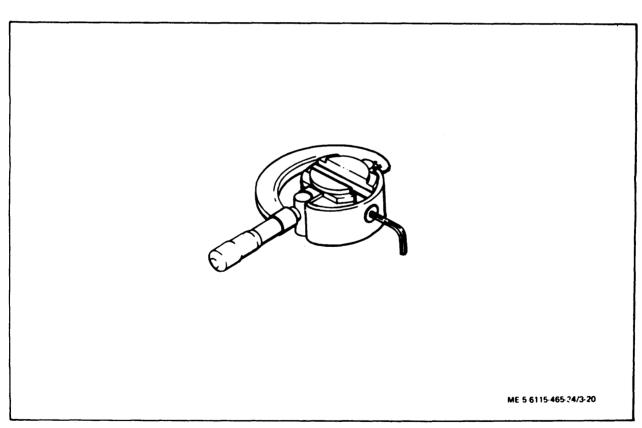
Adjusting Fuel Injection Pump Roller-to-Roller Dimension
